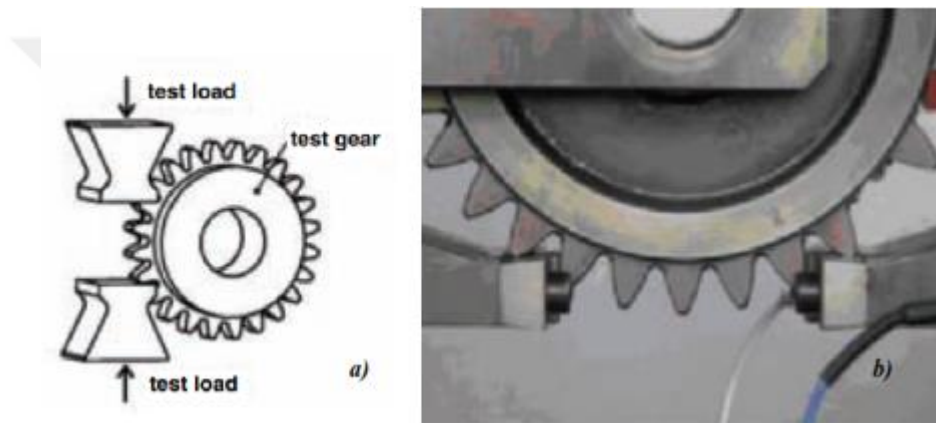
a) Test scheme without supporting the gear blank b) Gear specimen during test
